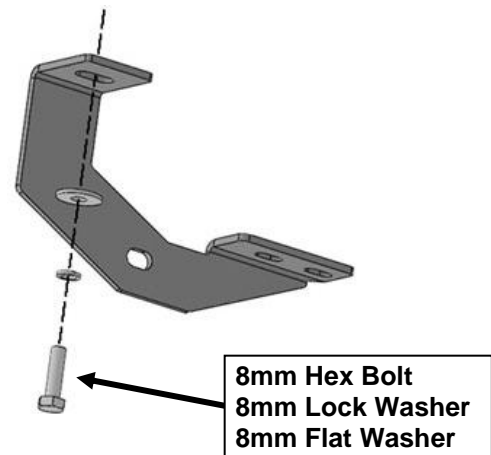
Attach the Passenger/Right Front Mounting Bracket to the Nut Plate
